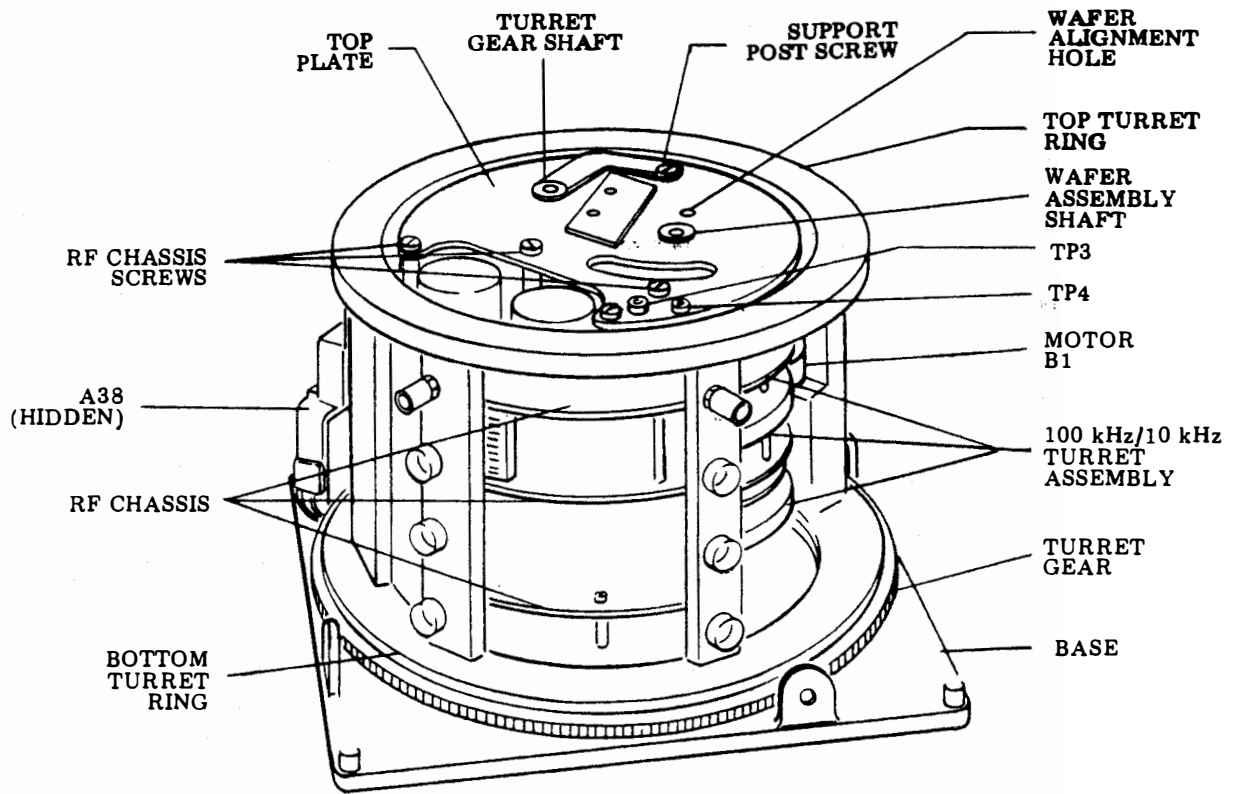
RF Amplifier Assembly A2A4, Disassembly Parts Identification
